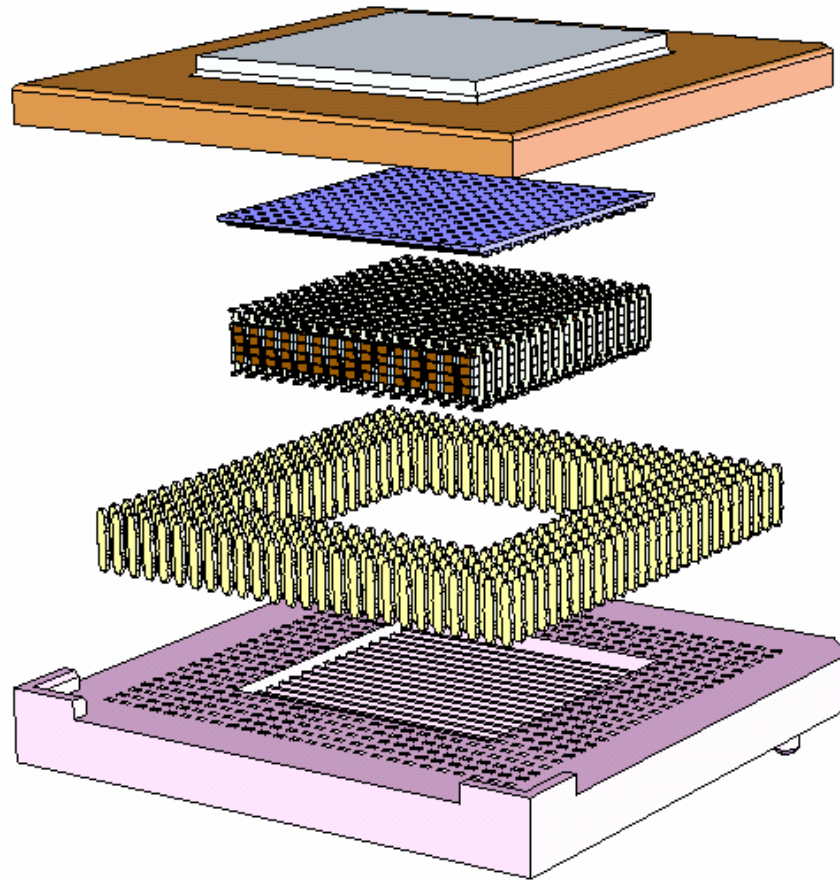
Exploded view of the interposer assembly. The die/substrate is at top, with a top cover next, then the capacitor core, then signal pins, and finally, the interposer body at bottom.
